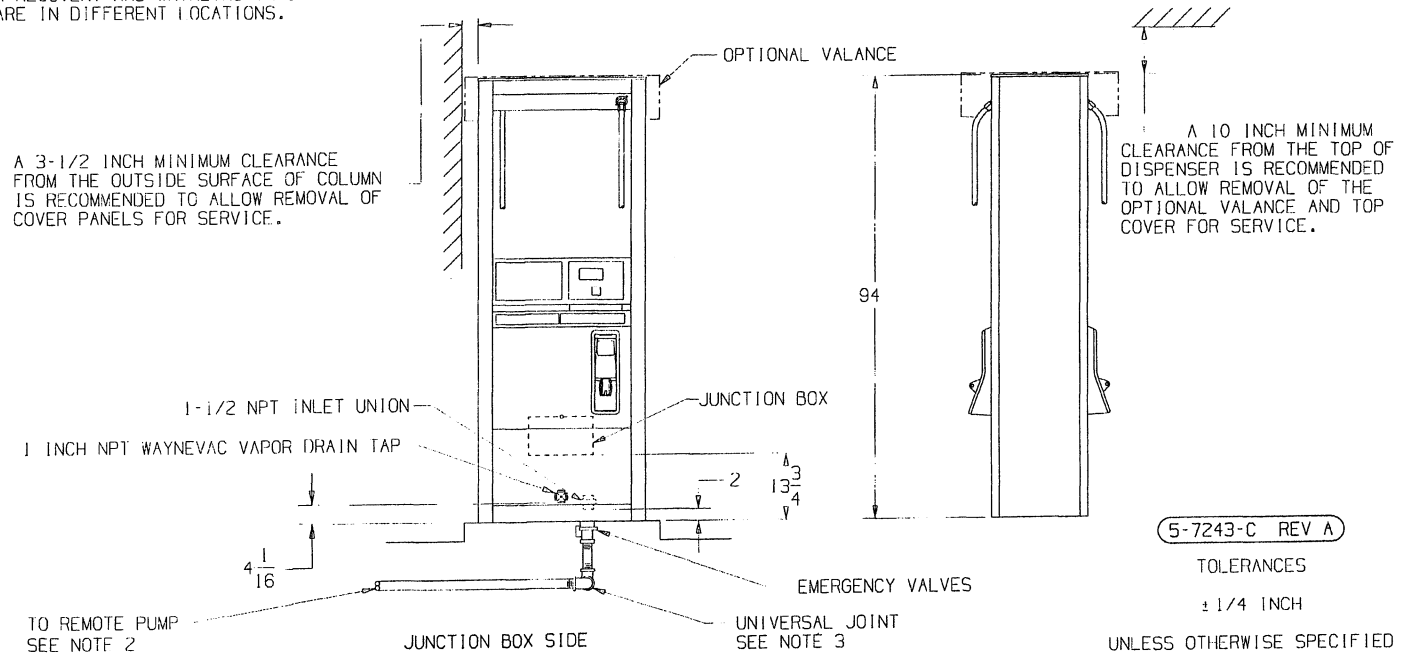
4-7243-C Installation Instructions - 3/V490D/U (Remote)
